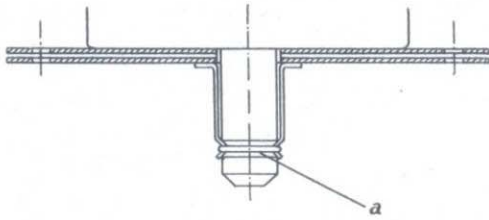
In this valve holder the valve is kept firmly on the base by a constriction on the spigot.
